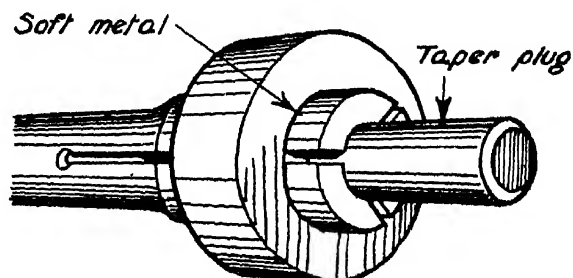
AN IMPROVED LAP FOR GAUGE MAKING
